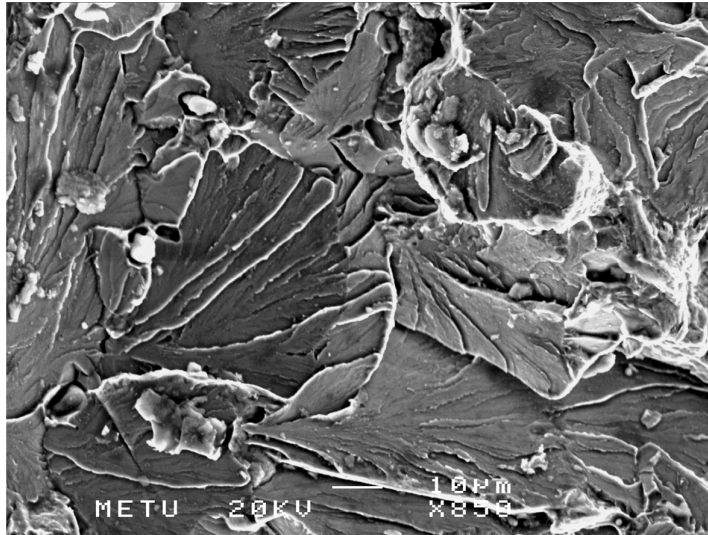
Cleavage planes from final fracture region, X850 (38MnVS6 crankshaft rolled at 12.5kN).
